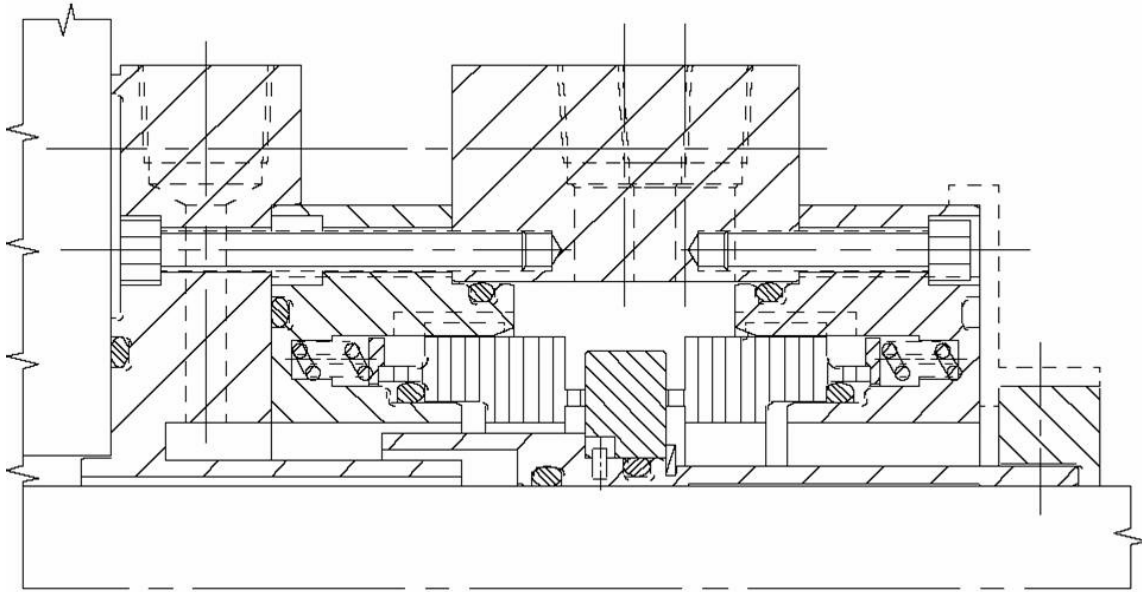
Double mechanical seal with steam port and debris well (Crane 7700)
